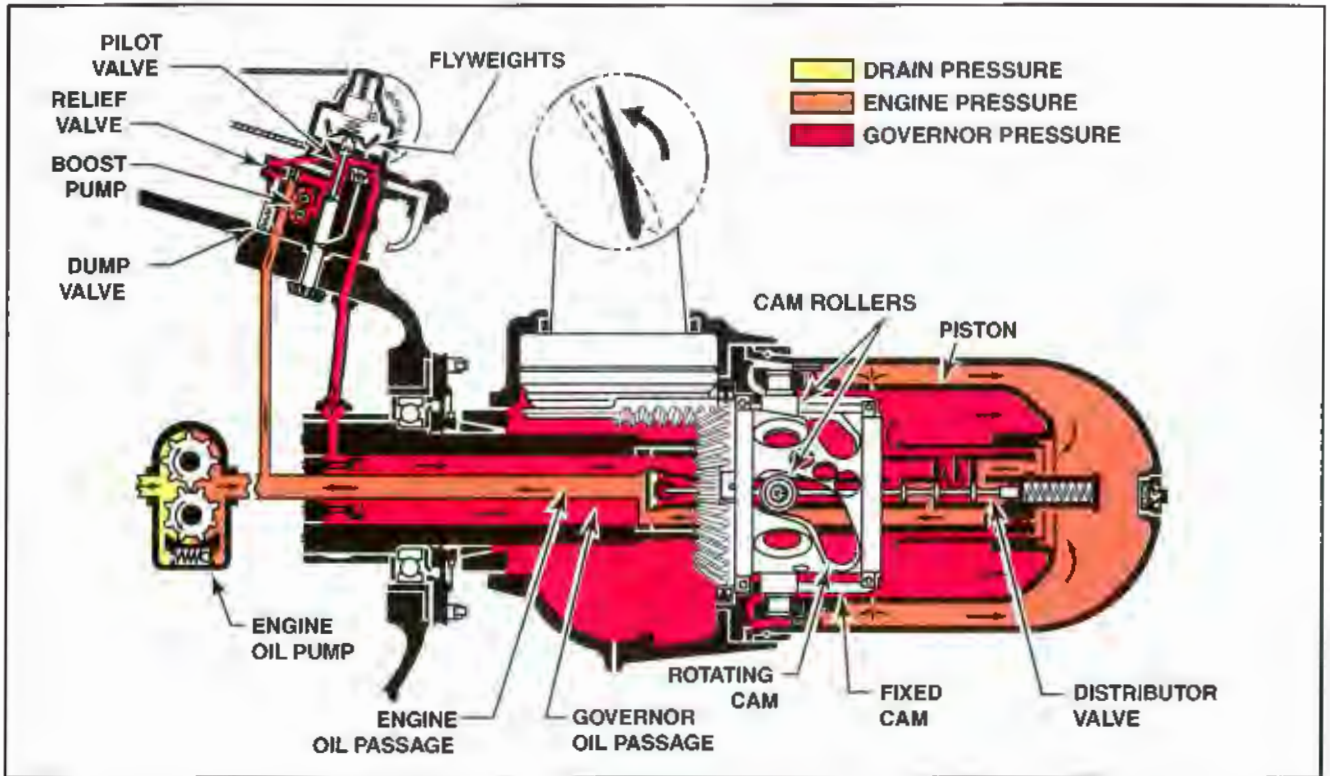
In an overspeed condition, governor oil pressure forces the piston in the dome assembly forward. As a result, the cam rollers move forward and rotate the cam. As it rotates, the beveled gear attached to the back of the cam engages the propeller blade sector gears and rotates the blades to a higher angle.
